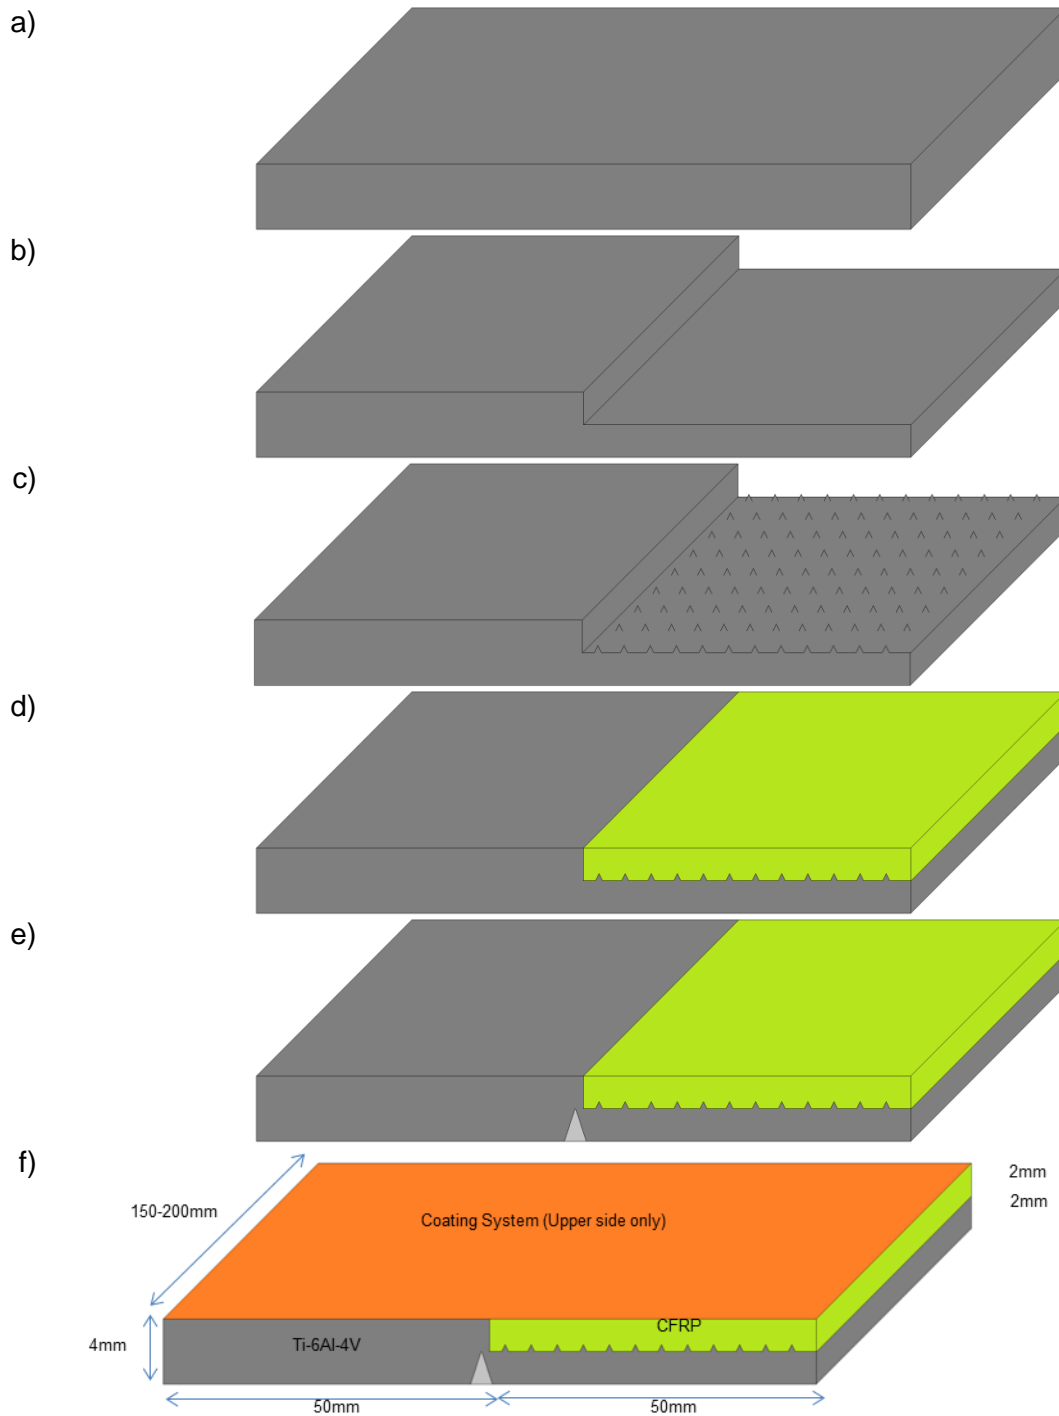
Primary sub-element demonstrator design, showing manufacturing steps: a) Preparation of initial Ti-6Al-4V sheet, b) Machining of 2mm deep groove on one side to accommodate CFRP, c) Surfisculpt of machined surface, d) Layup and curing of CFRP, e) Laser welding in vicinity of Ti-6Al-4V to CFRP interface (1.5mm offset), f) Application of surface protection system to one side. Diagrams are not to scale
